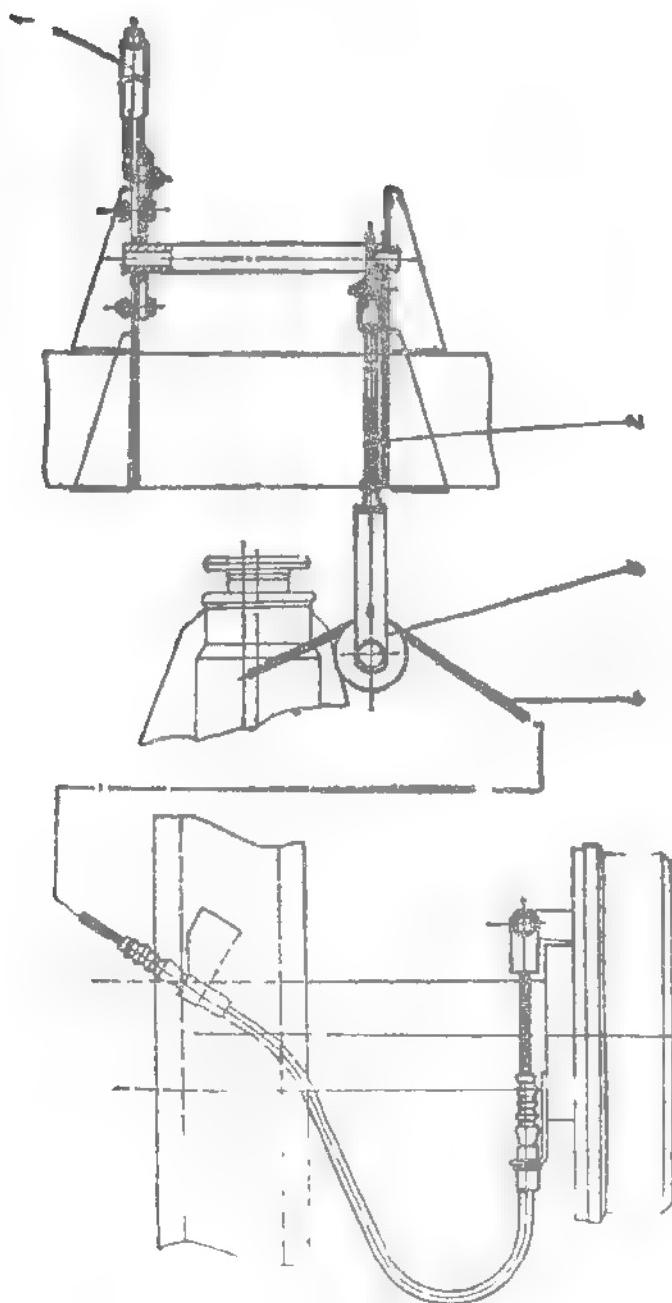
HAND BRAKE CONTROL - TYPE I
